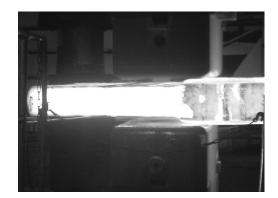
Forging reduction in thicknesswise of continuous casting slab
